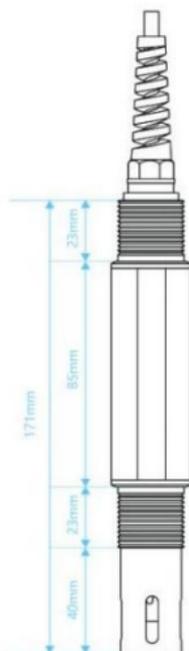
Quadrupole Electrode Dimensions NPT3/4 Thread (Unit: mm)
